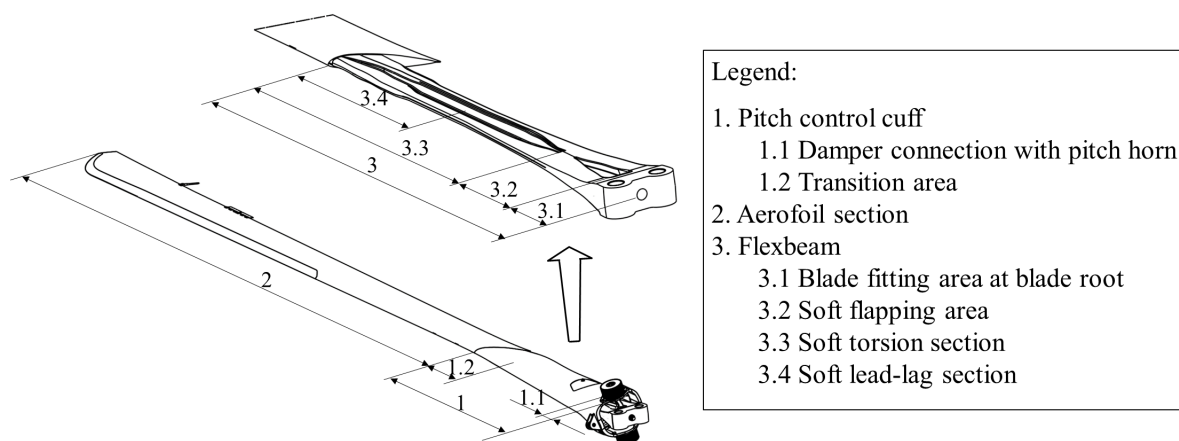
H135 bearingless main rotor rotor blade (reproduced from Bansemir et al [258])
